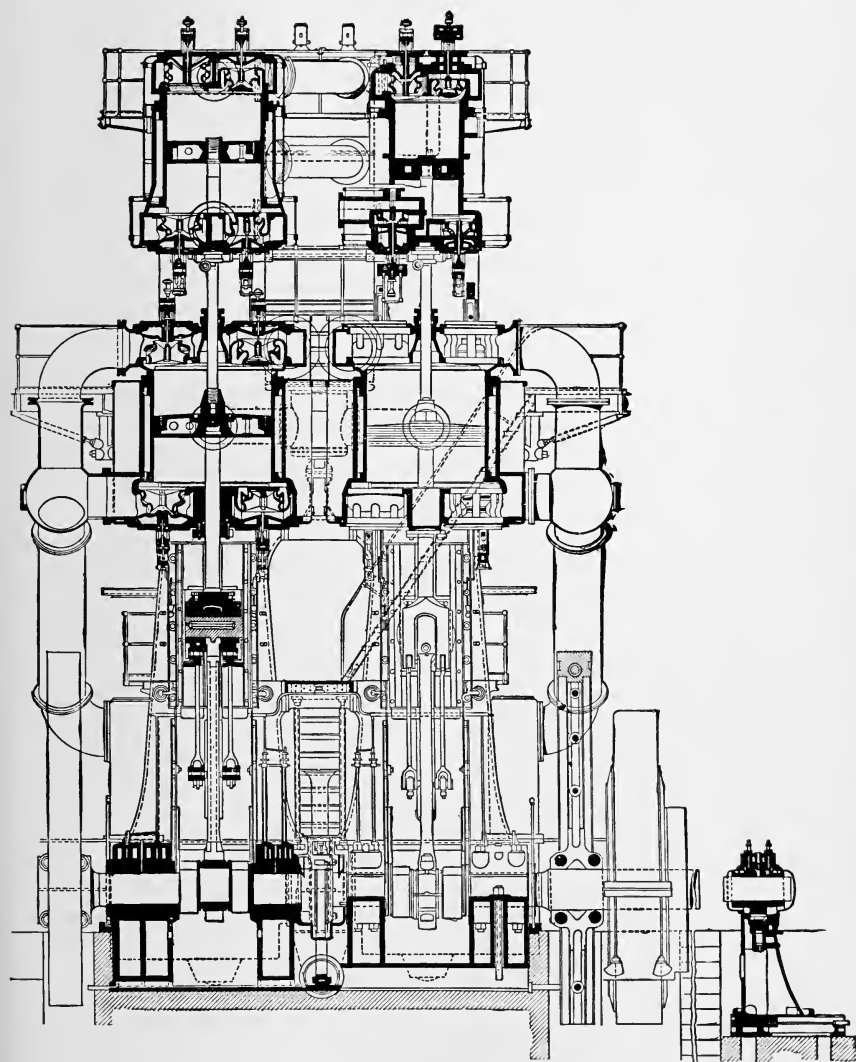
3000-hp. Sulzer Engine Designed for Highly Superheated Steam.
